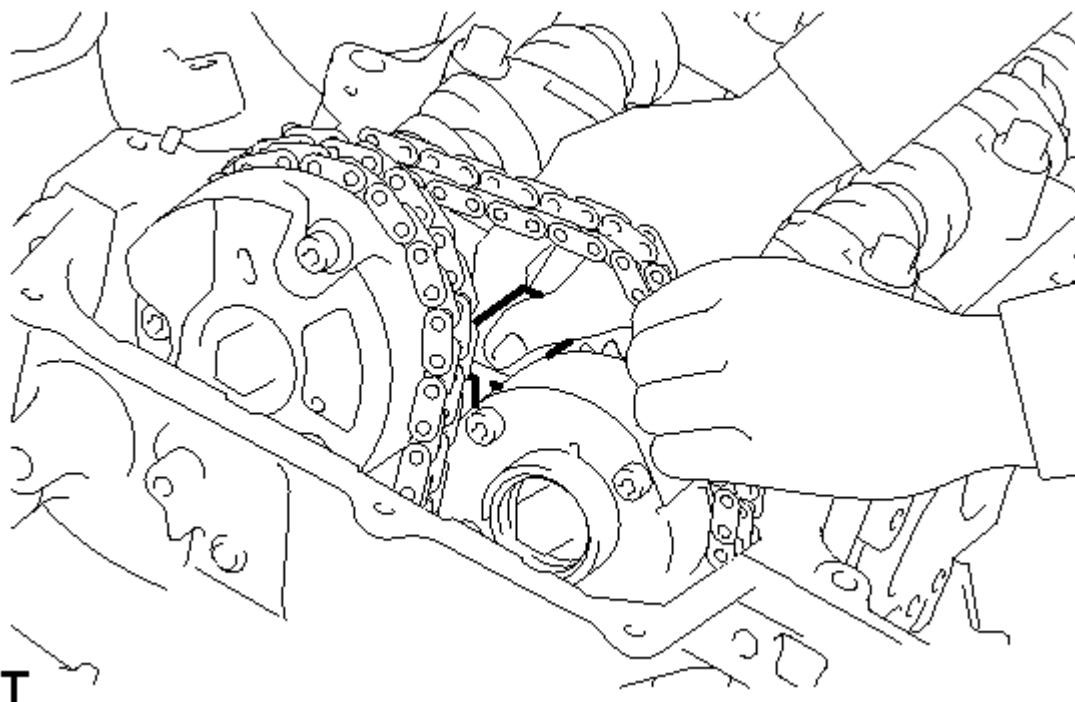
Remove/Install No. 3 Chain Tensioner Assembly While Lifting Up The No. 4 Camshaft
